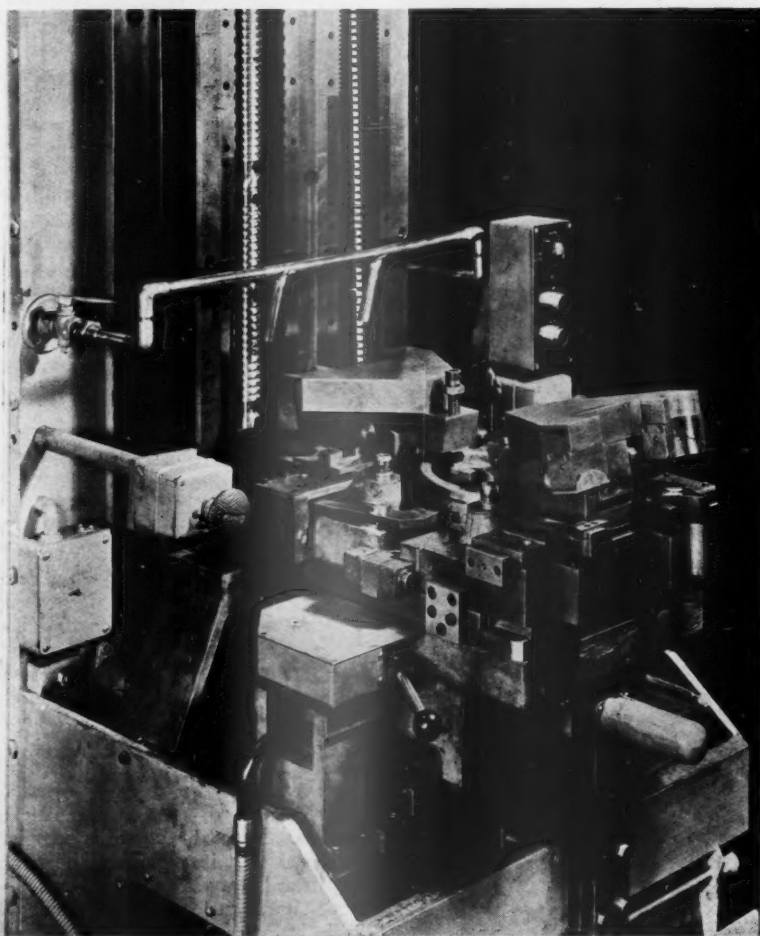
The work-holding fixture and indexing table on a Weatherley Oilgear surface broaching machine for connecting rods.
